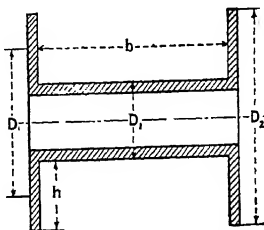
CROSS-SECTION OF MAGNET SPOOL.
